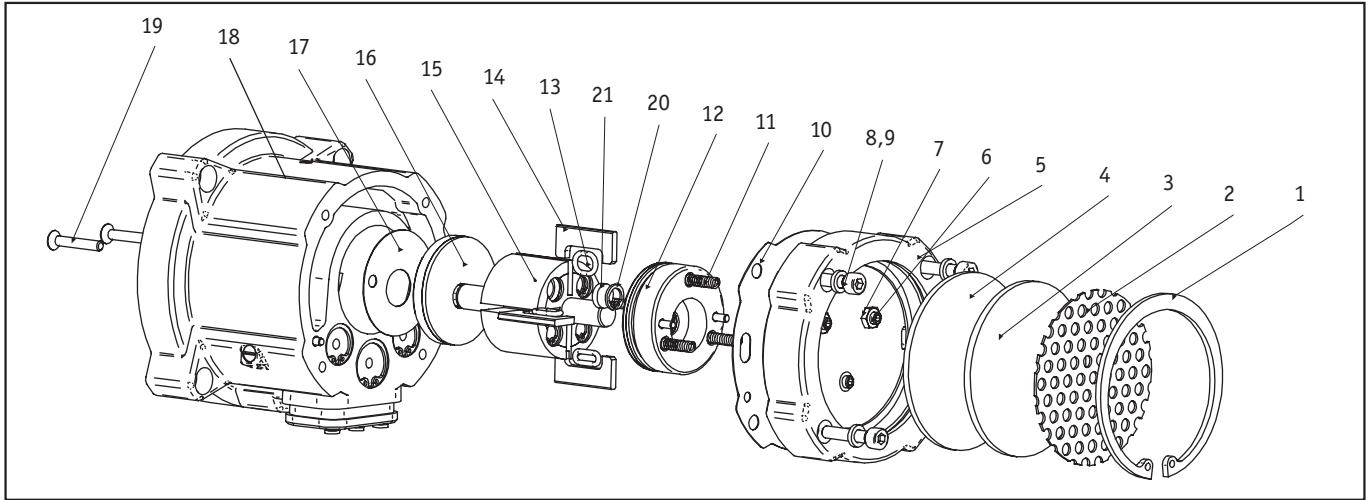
Replacing brake discs, brake piston and vanes/Motor assembly for motorised trolleys up to 6 tons carrying capacity
